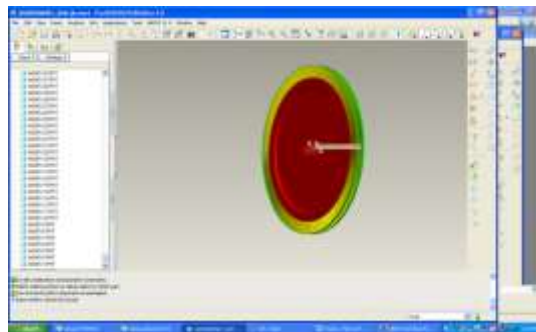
Assembly of Single Stage Steam Turbine Rotor
